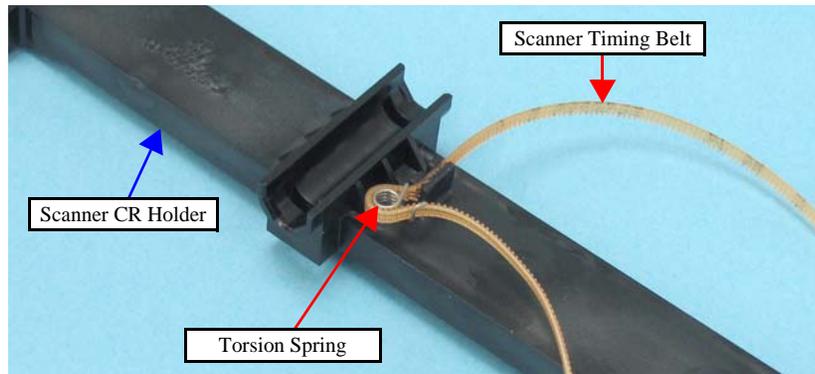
Removing the Scanner Timing Belt and Torsion Spring
